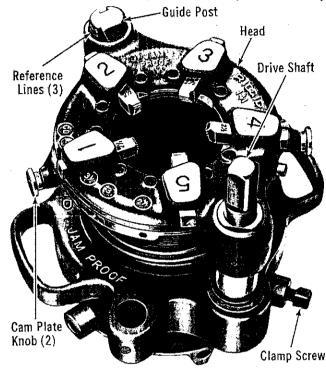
No. 141 Geared Threader with Drive Shaft Up.
